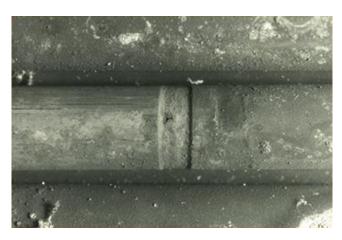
Tube-to-Support Fretting Wear: Note Hole Through Tube Wall (Pettigrew, 1976).
